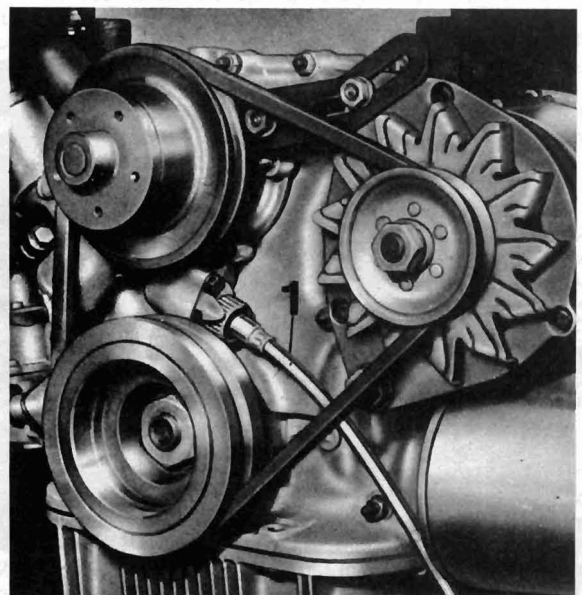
Tachometer drive connection (1) at coolant pump (Sec 11)
